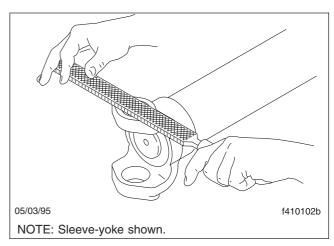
, Remove Burrs from the Machined Surface of a Full-Round Yoke Lug
